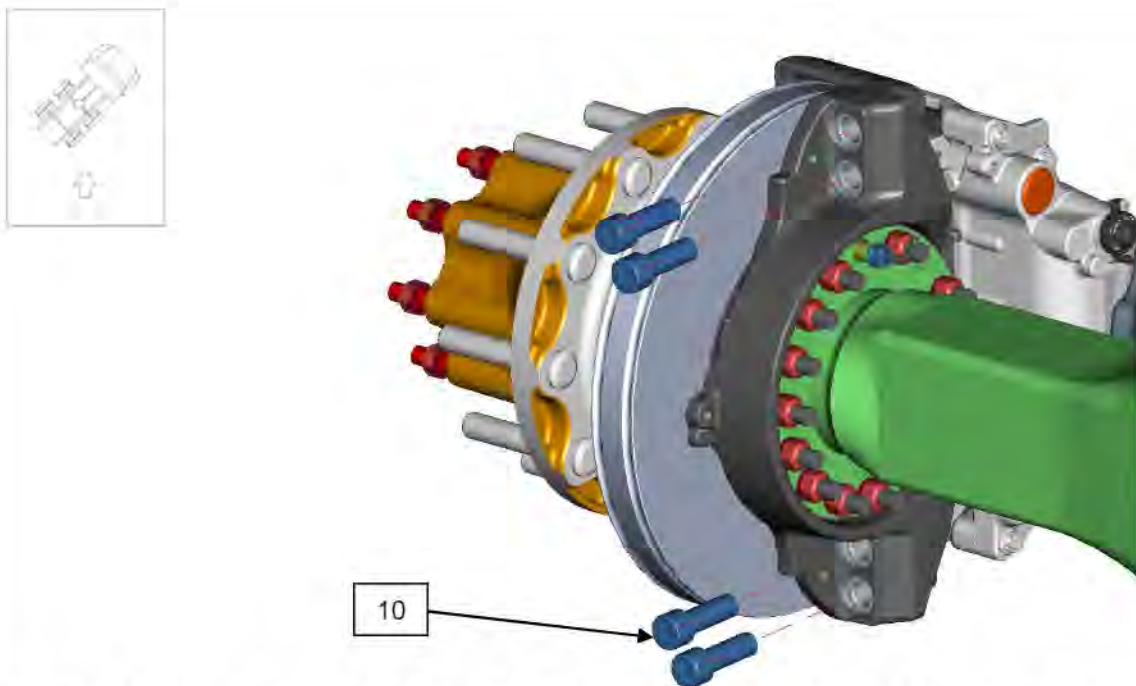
Exploded View of the Axle End and Hardware Needed for the Attachment of the Brake Caliper to the Adapter Plate
